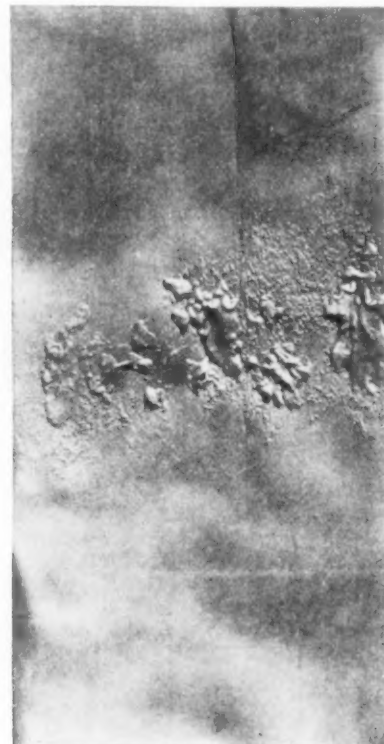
CORROSION ON TUBE CONTAINING INTERIOR SURFACE DEFECTS.
